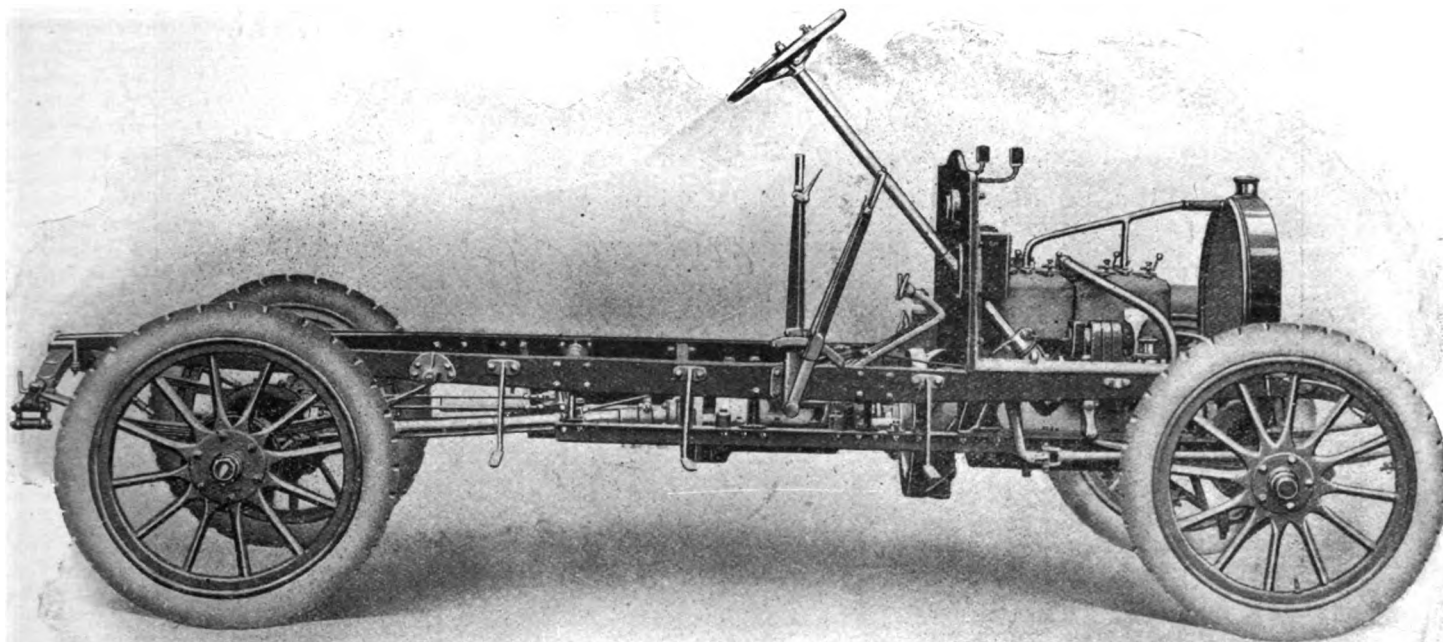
Chassis of "Empress" 16-20-h.p. Car.
